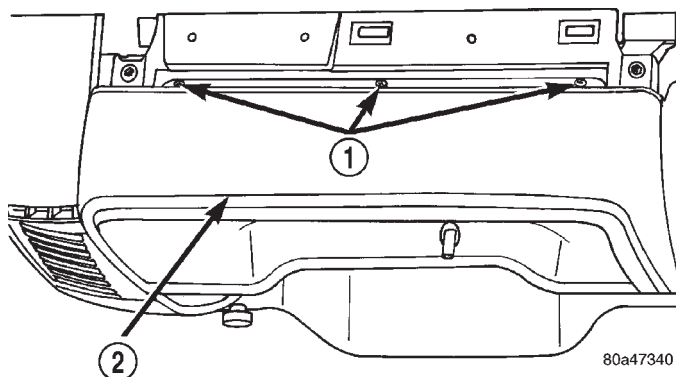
Cluster Bezel Upper Screws Remove/Install
